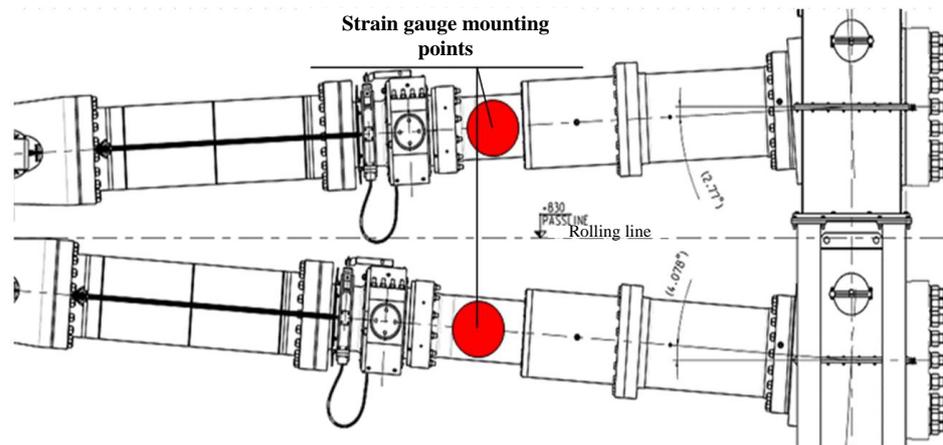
Instrument mounting points on the upper and lower rolls' spindles.
